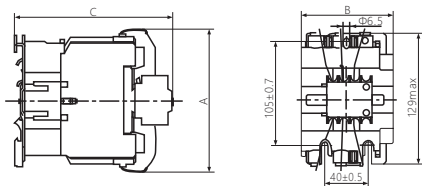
Outline and installation dimensions of CJ19-63~95 contactors
